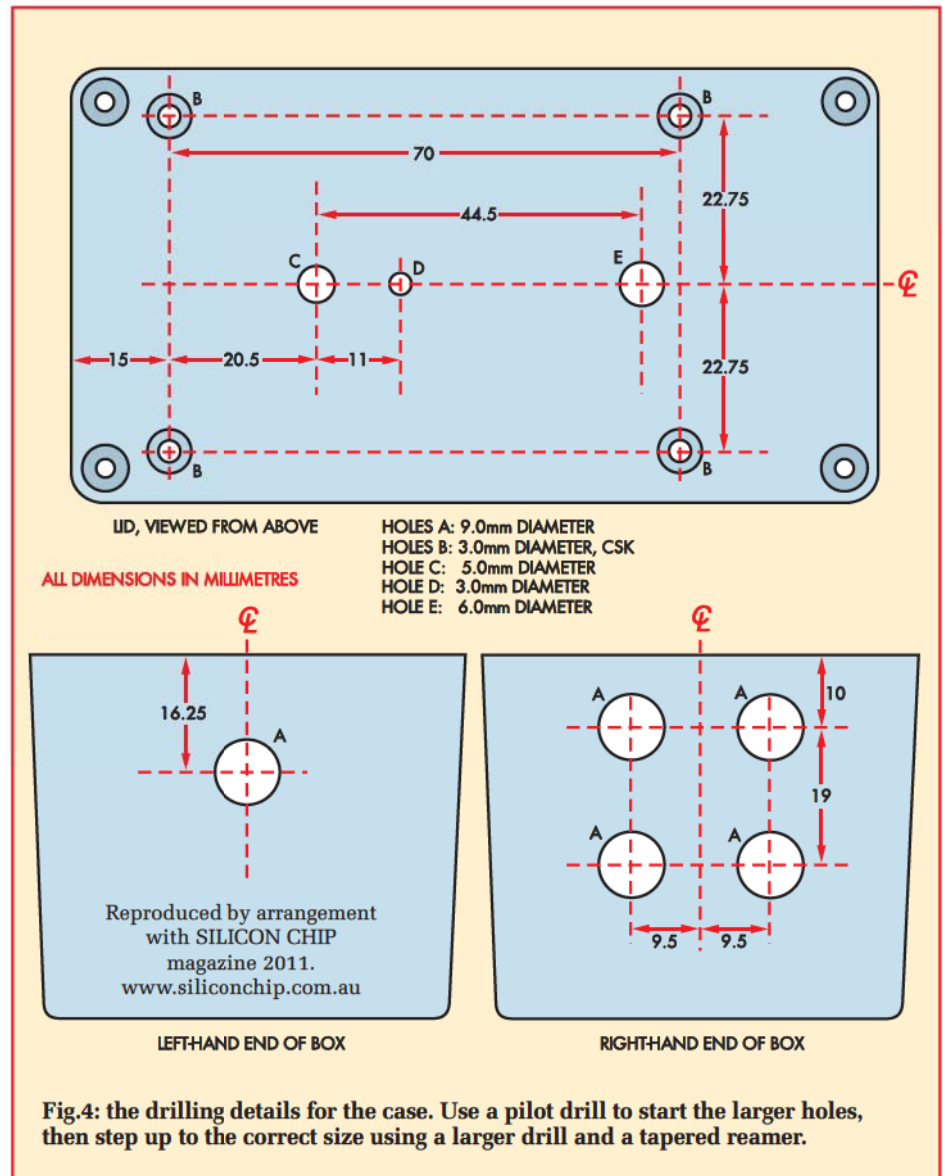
the drilling details for the case. Use a pilot drill to start the larger holes, then step up to the correct size using a larger drill and a tapered reamer.
